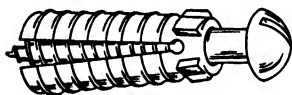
Typical expansion bolt. As the bolt is screwed into the tapered shields, the shields are forced apart and caused to grip the sides of the hole. (Courtesy Western Electric Co.)
